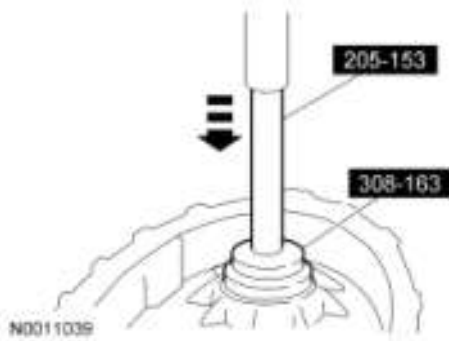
Using Special Tools To Press Front Output Shaft Support Bearing Into Case
